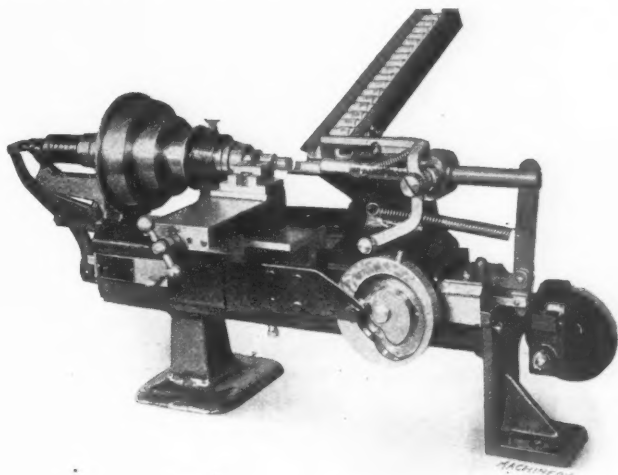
Front View of Sloan & Chace Automatic Lathe
